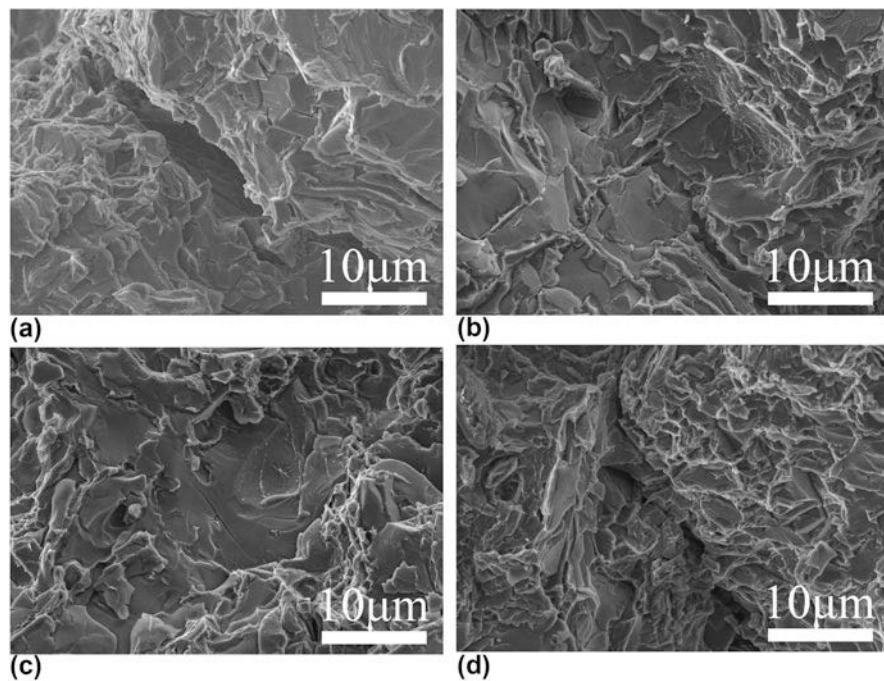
Fracture surface of tensile tested samples of rheo-squeeze casting AZ91–2Ca–1.5Ce alloy under different pouring temperatures observed by SEM: (a) 600 °C; (b) 593 °C; (c) 590 °C; and (d) 587 °C.
